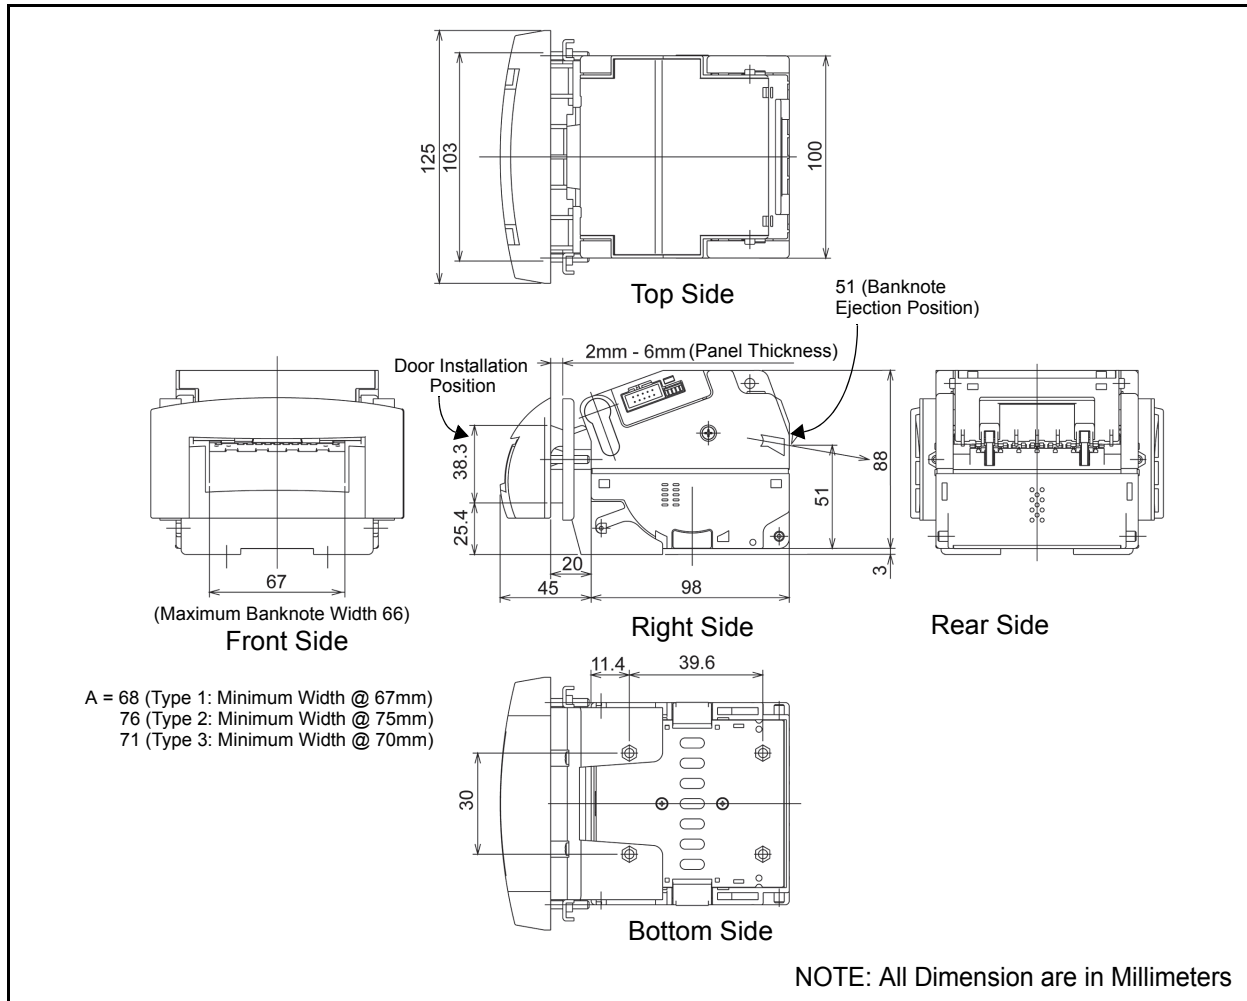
Taiko PUB-11 (US Dollar) Complete Unit Outside Dimensions
